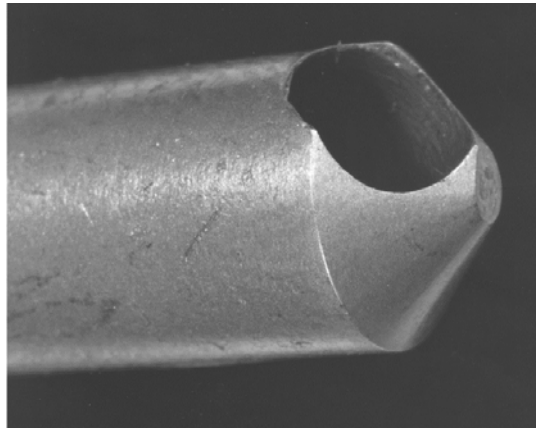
Countersink Tool for Deburring Plastic Part Holes
